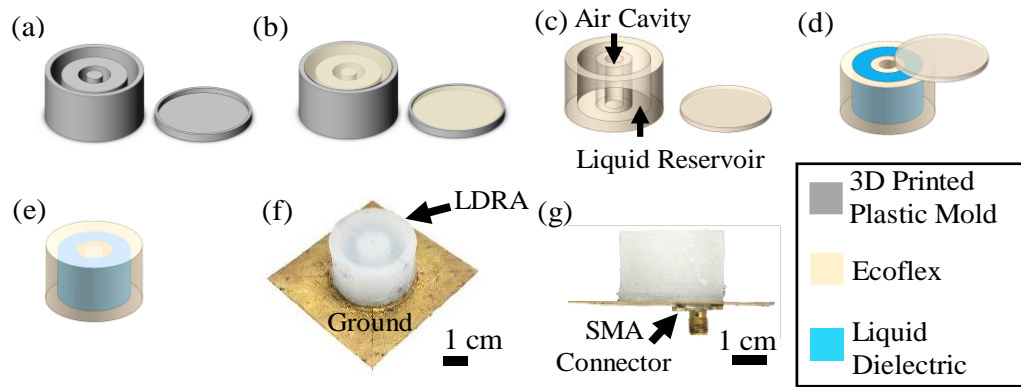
The fabricating processes of the LDRA. (a) 3D printed plastic molds. (b) Pouring Ecoflex solution into the molds. (c) Removing Ecoflex container from the molds. (d) Pouring liquid dielectric (acetonitrile) into the Ecoflex container. (e) Sealing up the container. (f) The LDRA is placed on a copper-based ground plane and soldered with an SMA connector. (g) Side view of the completed LDRA.
